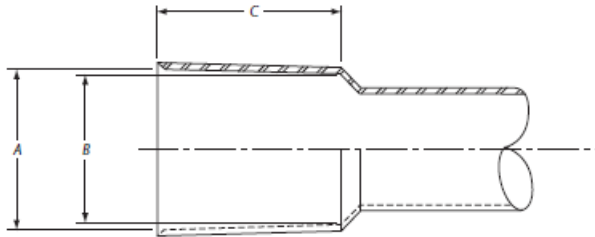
Sch40 Integral Coupling Dimensional Drawing
